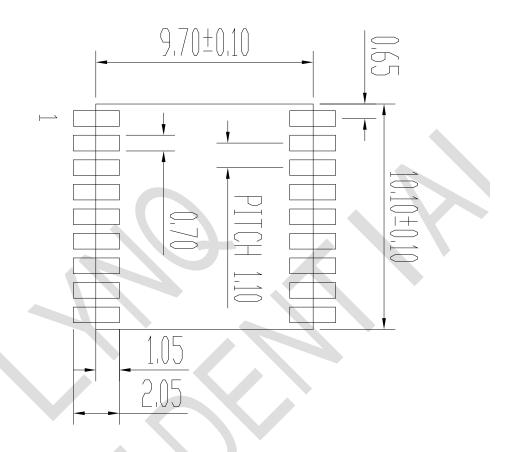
Recommended PCB decal (top view) (Unit: mm)
